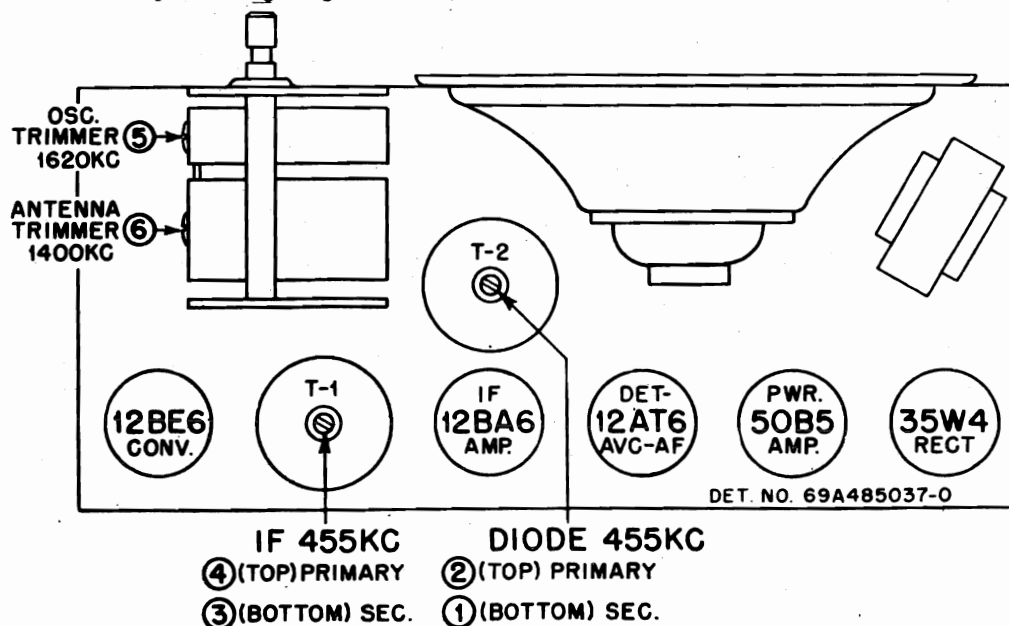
CHASSIS HS-116 TUBE & TRIMMER LOCATIONS
